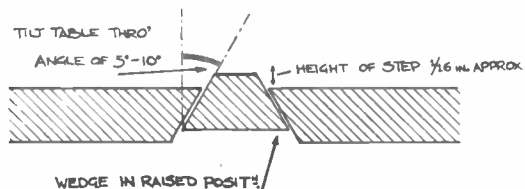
The tilted table — a cross-section showing the use of the wedge-shaped cut
